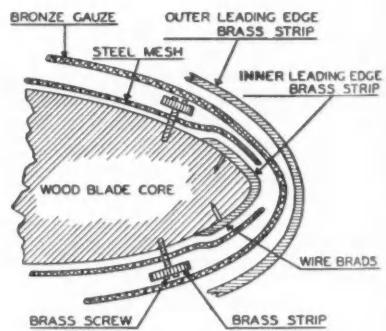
Exploded view of leading edge assembly of German composite propeller blade.
